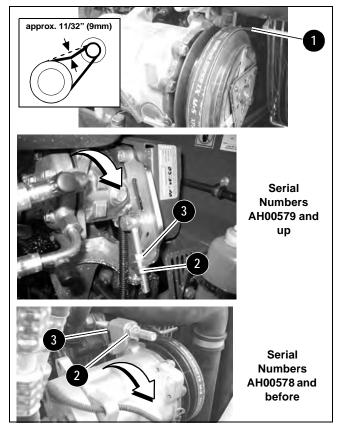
Checking & Adjusting Air Conditioning V-belt Tension
